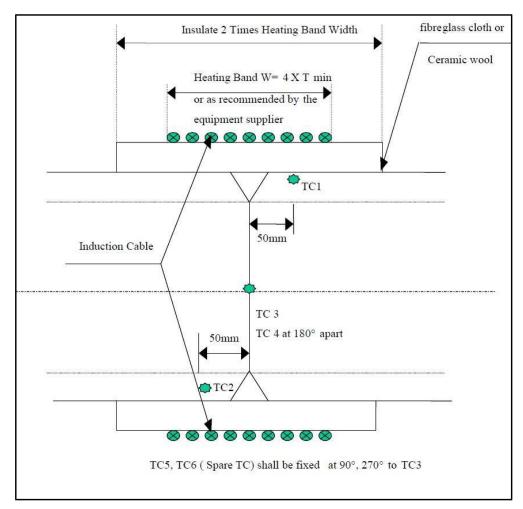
Placement of Thermocouples on P91/P92/F91/F92/C12A materials for PWHT
